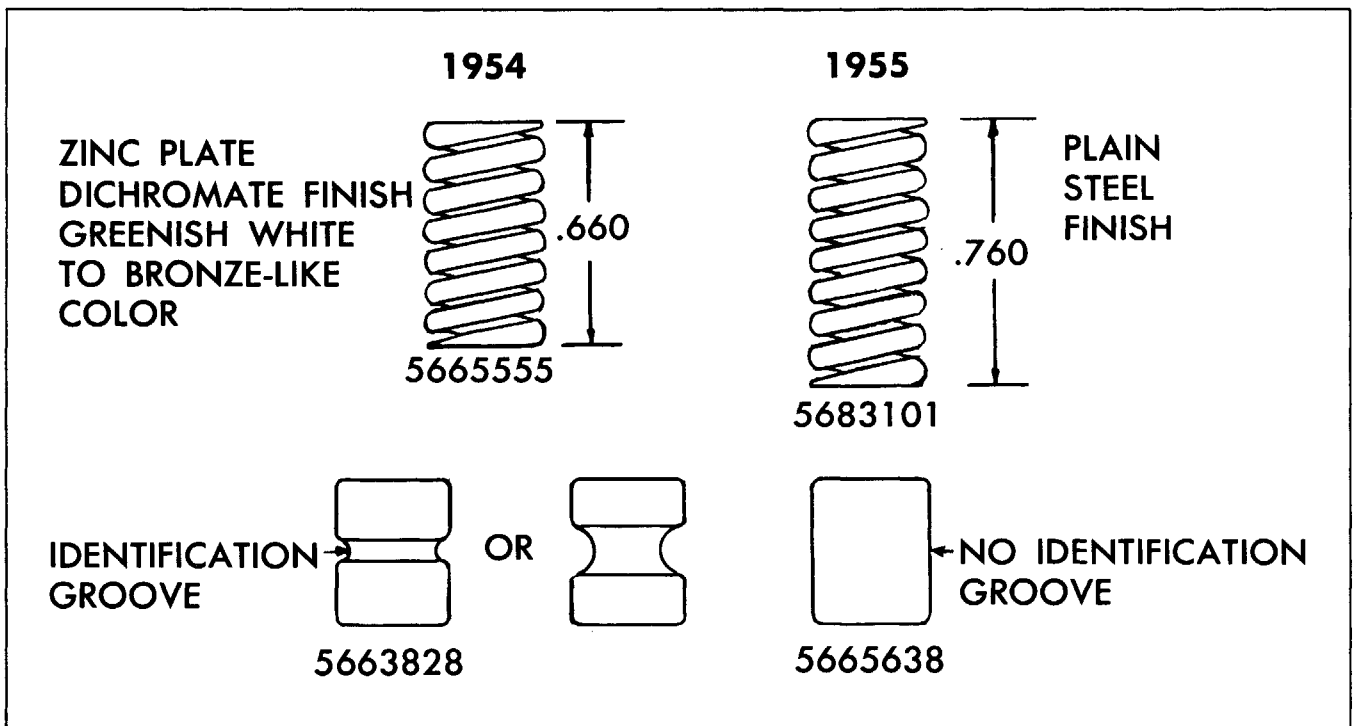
Comparison of 1954 and 1955 Power Steering Valve Centering Springs and Plungers
